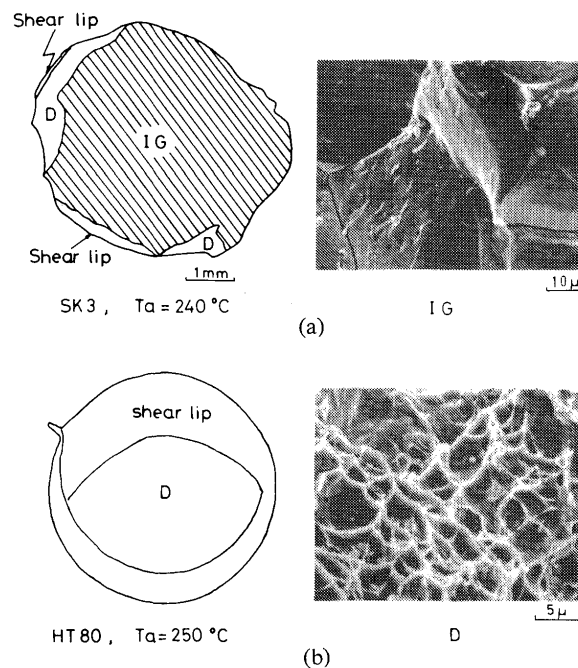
Examples of fracture surfaces in specimens by Synthetic quenching crack test
